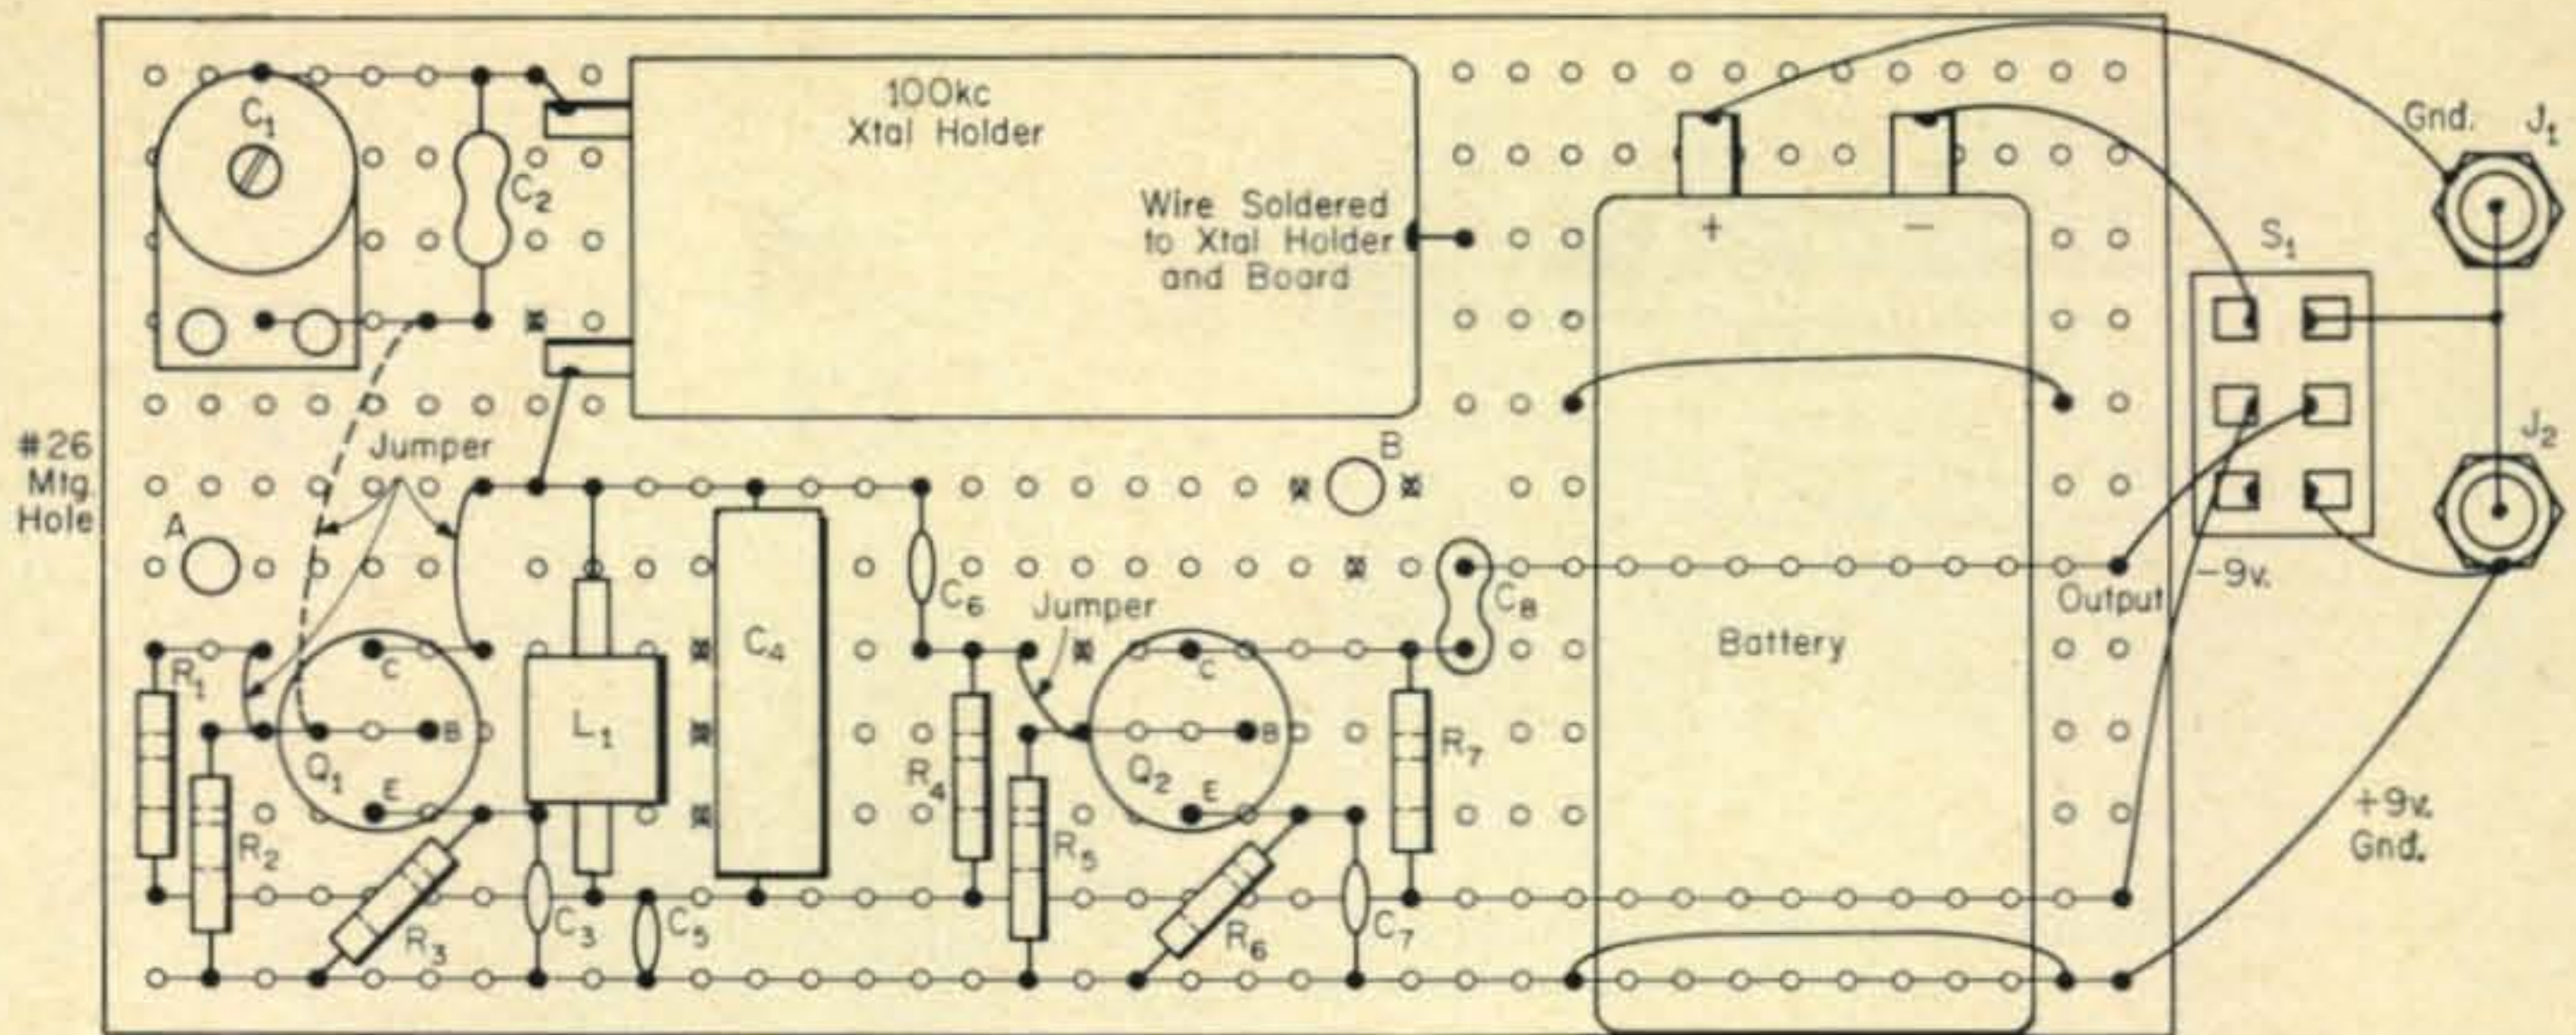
Placement of calibrator components on the front of the Veroboard. Solid dots indicate soldered connections on the rear. Break in copper strips are made at points marked X. Horizontal lines between holes indicate part of board foils that are actively engaged in the circuit. Holes at A and B should be drilled to size #26 for 6-32 mounting screws. The two jumpers across the battery hold it in place.
